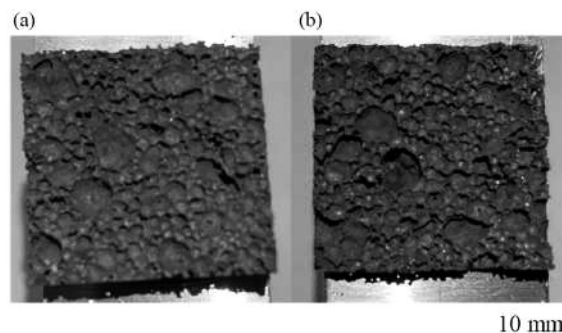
Fracture surface after tensile test of (a) porous ADC12 side, (b)A1050 plate side
